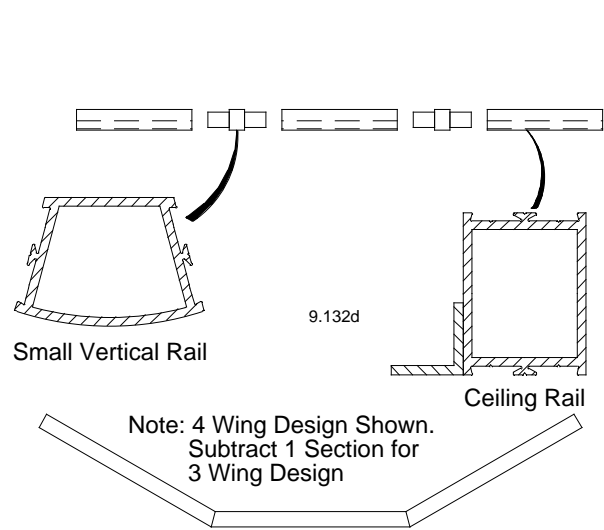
Drum AssemblyFigure 8 - Vertical/Horizontal Rail Attachment
